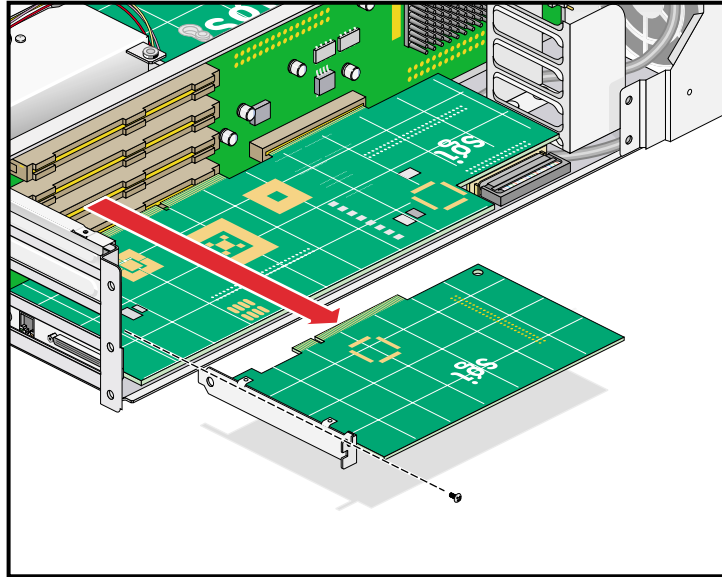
Removing the Retaining Screw and Extracting the Card
